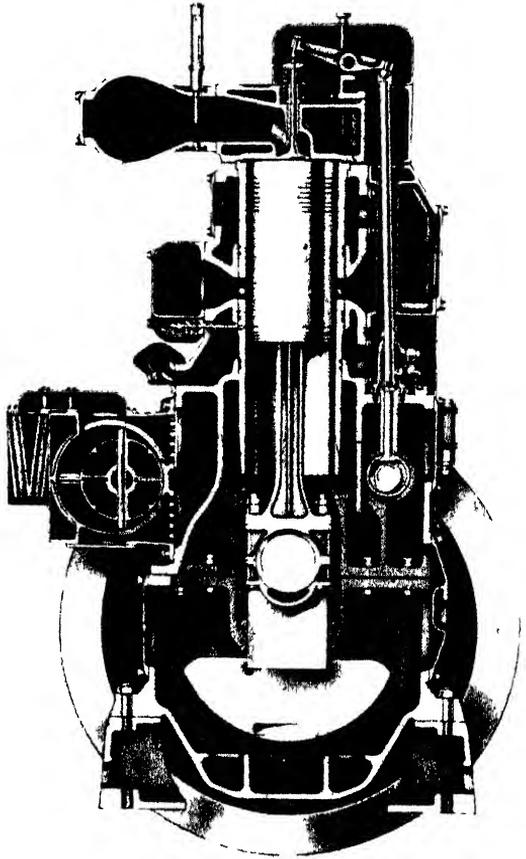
Petter Super-scavenge Oil-Engine. Sectional illustration
